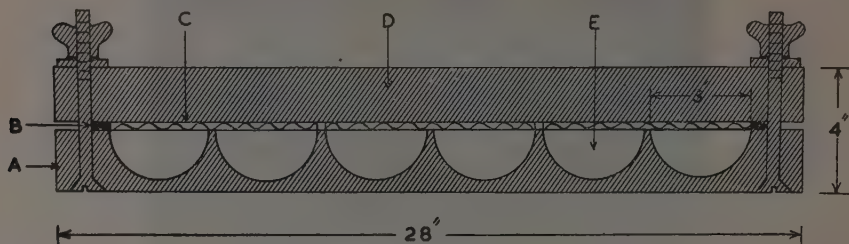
CROSS-SECTION THROUGH THE CAMERA
